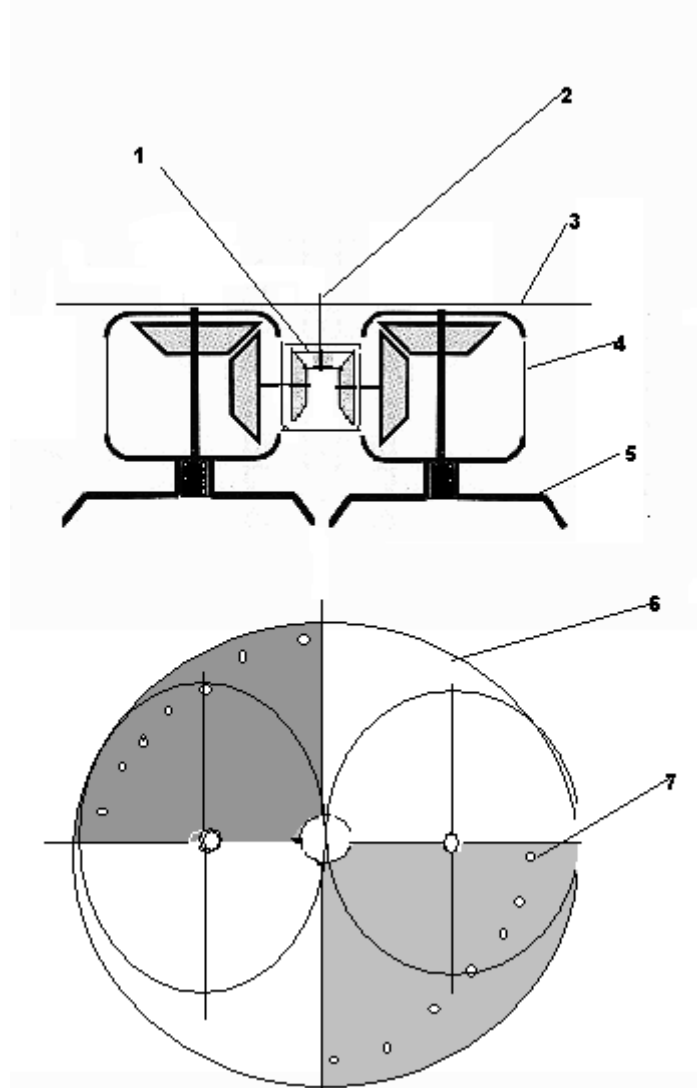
Assembly of rotations: 1-shift. 2-conical group 3-support 4-conical group, 5-cuter, 6-rotari support, 7-adjustment holes in the protection zone
